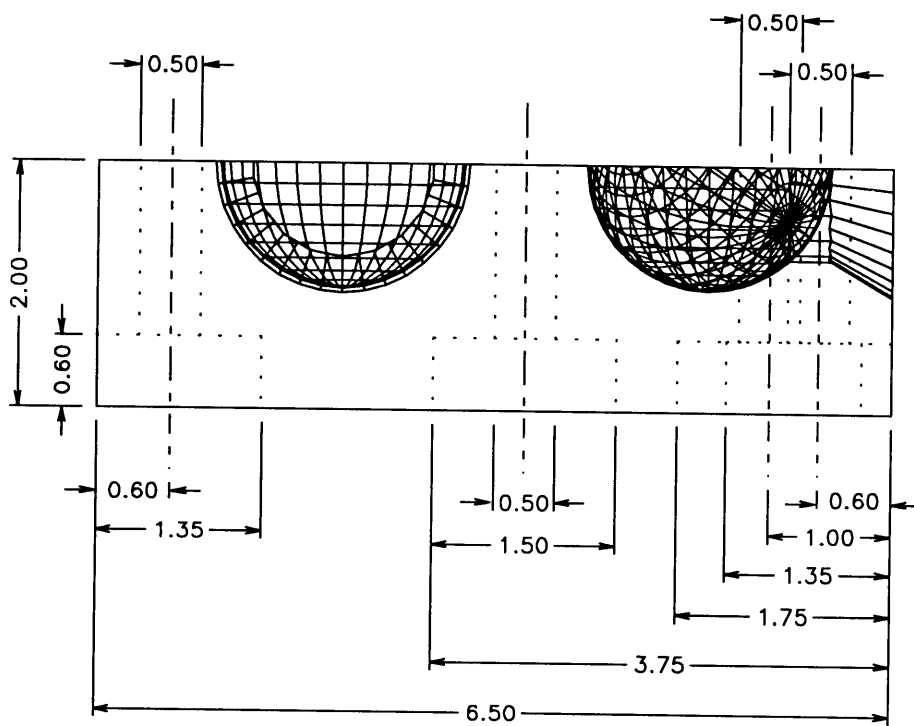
Joint 'B' Bottom Section Inverted (Oblique View).
